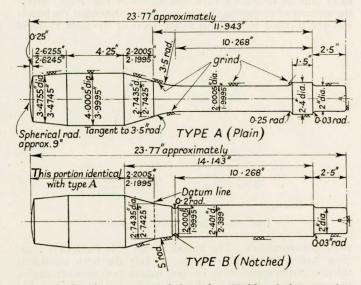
Specimens as used in 2-in. Wohler fatigue testing machine
